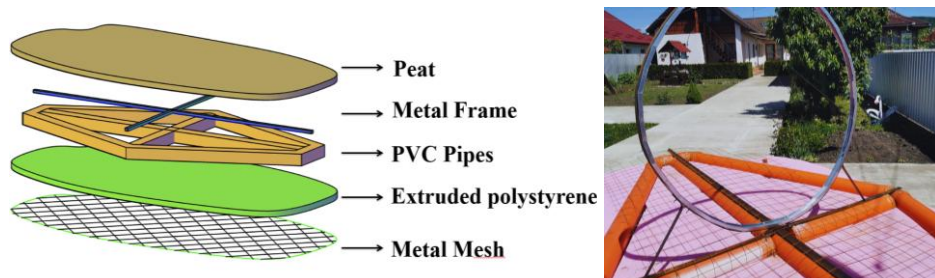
Technical development: (left) exploded structural scheme; (right) modular assembly of the platform components
